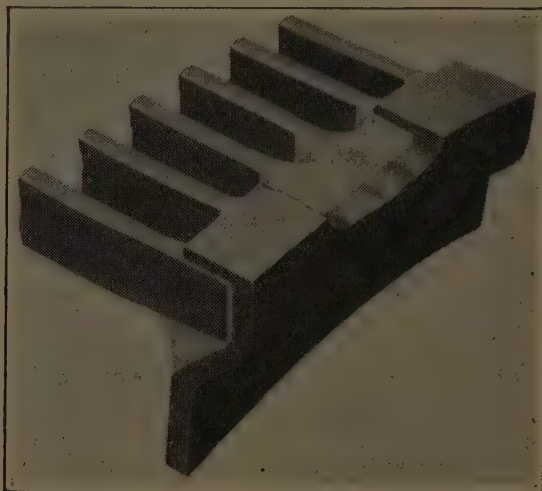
FIG. H.—Section of the winding on the rotor of Fig. G. With a portion of the ring removed to show the spelter completely filling the space around the bar ends.
